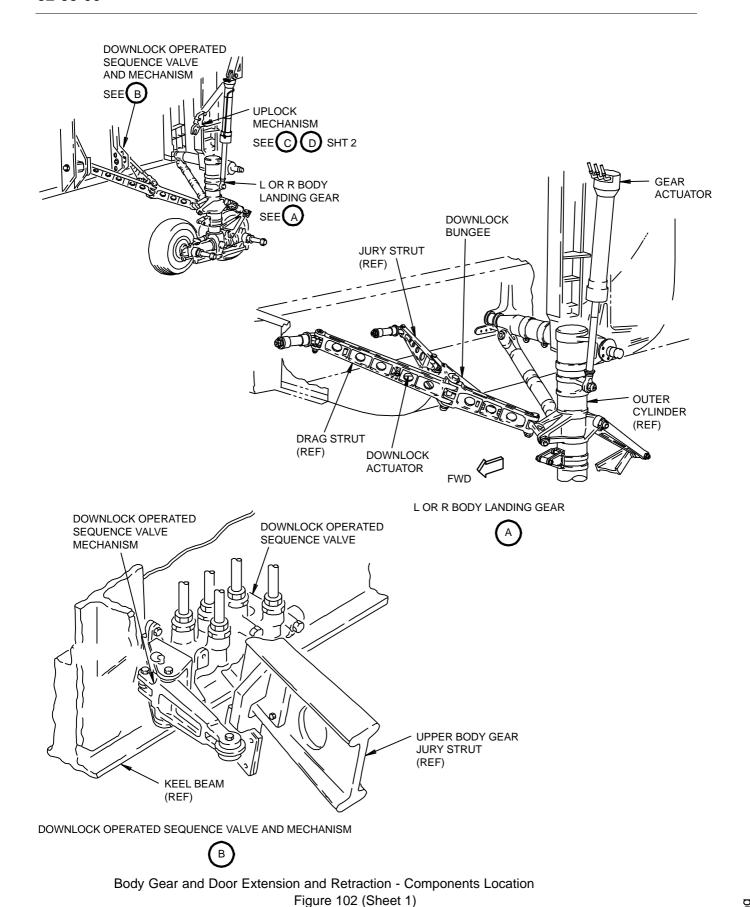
32-33 Body Gear and Door Ext./Ret. Comp. Location Fig. 102 (Sheet 1)
